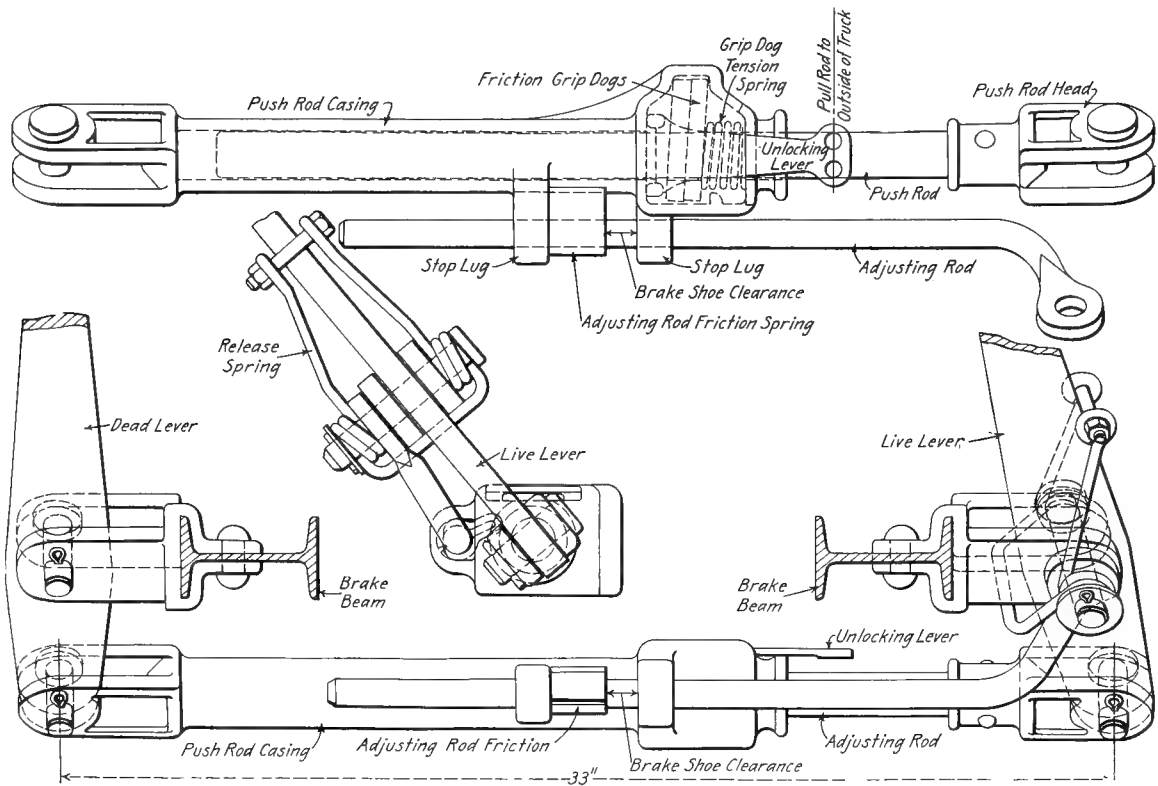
Universal Type Automatic Brake Adjuster for Freight Cars. Gould Coupler Company.
